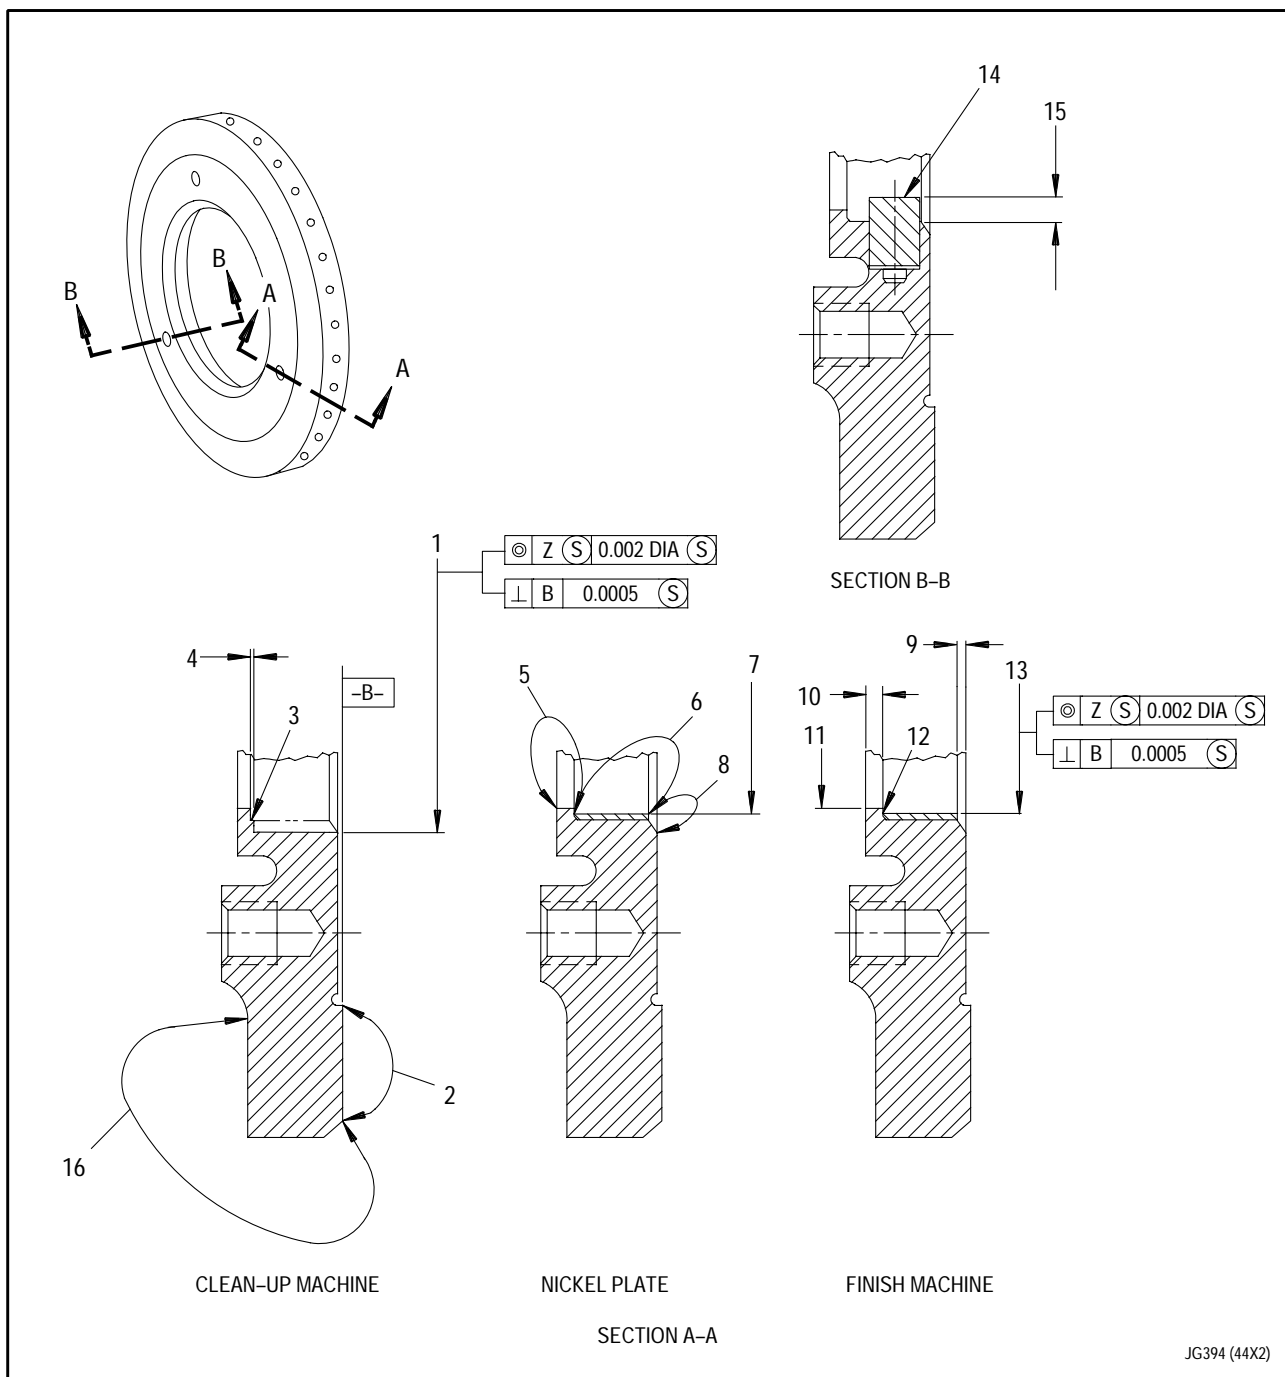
No. 3 Bearing Rear Seal Seat Assembly - Nickel Plate Repair of Inside Diameter
